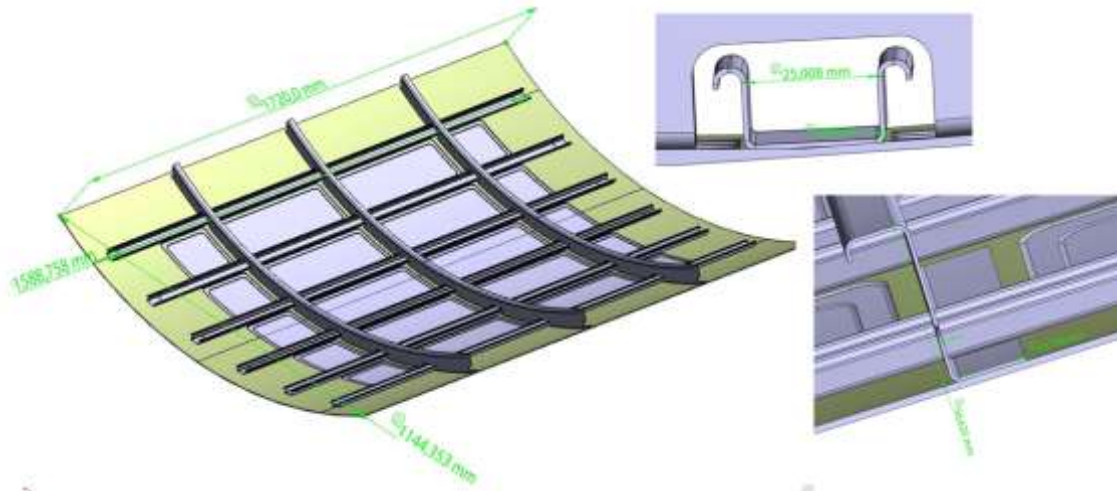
General design of fuselage panel demonstrator to be manufactured by FSLW and details of the design of stringers and frames.
